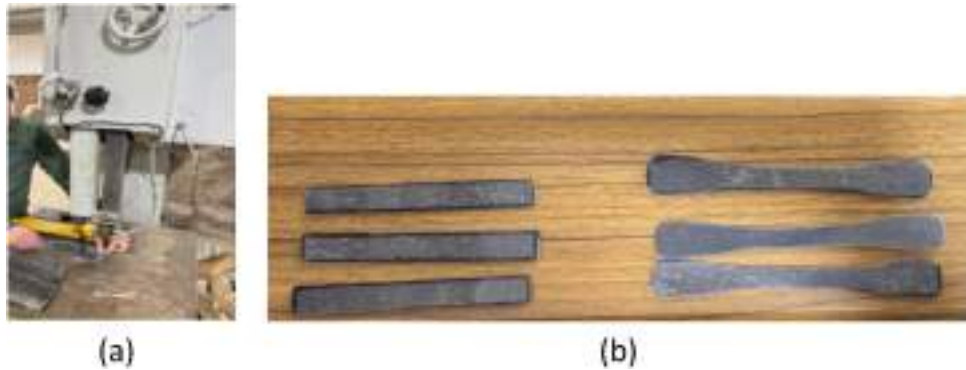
(a) Cutting process of composite plate. (b) Tensile and bending lamination specimens.
